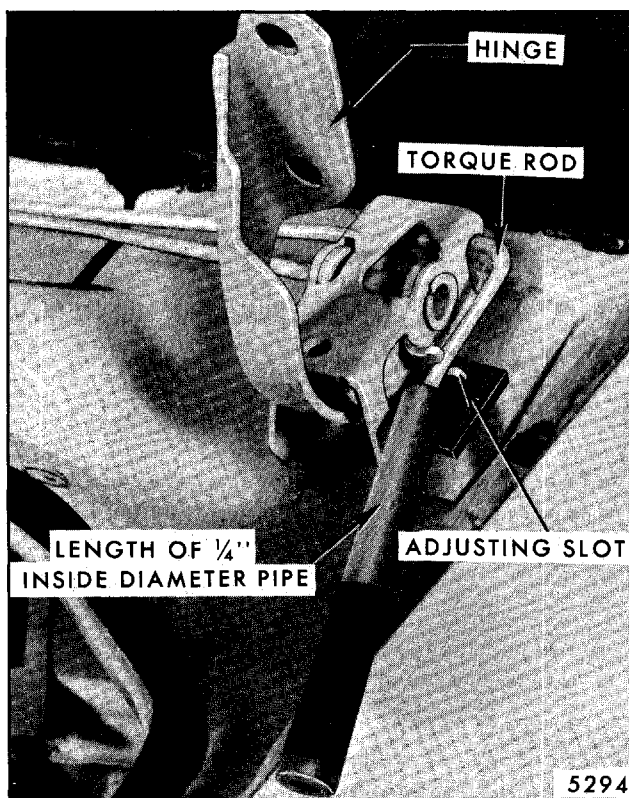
Rear Compartment Torque Rod Adjustment - "F" Styles
